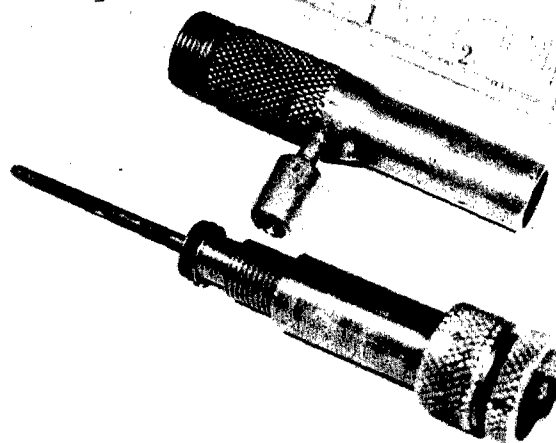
Partial Disassembly of Experimental Fuel Showing Body, Spiral Groove Plunger and Fuel Inlet and Outlet Passages
